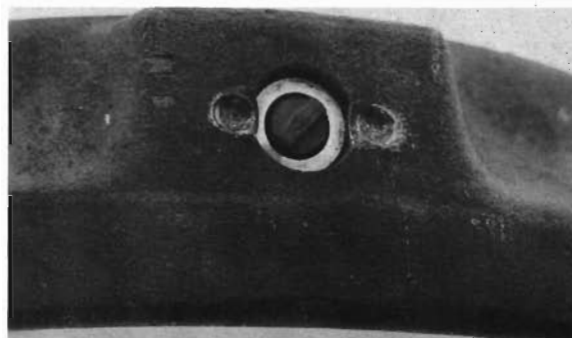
Vent Fitting in "AP" Bearing Backing Ring.
